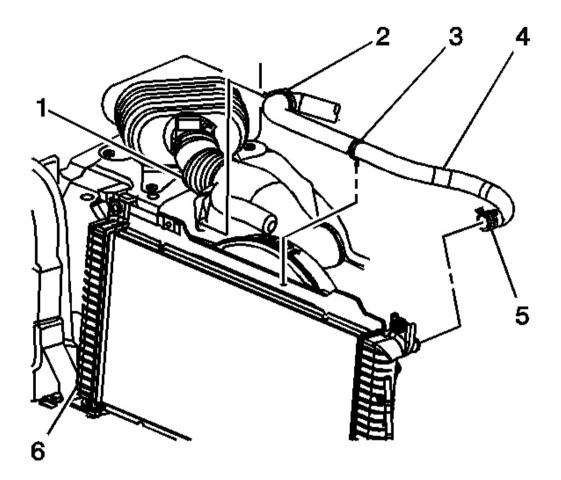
Radiator Hose & Radiator (Inlet) Courtesy of GENERAL MOTORS CORP.
